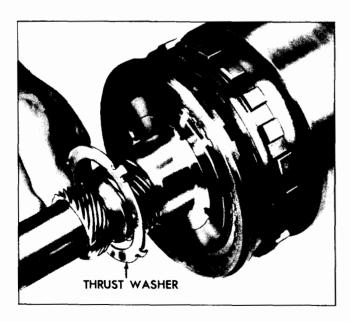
E-177 Installing Output-to-Case Thrust Washer
